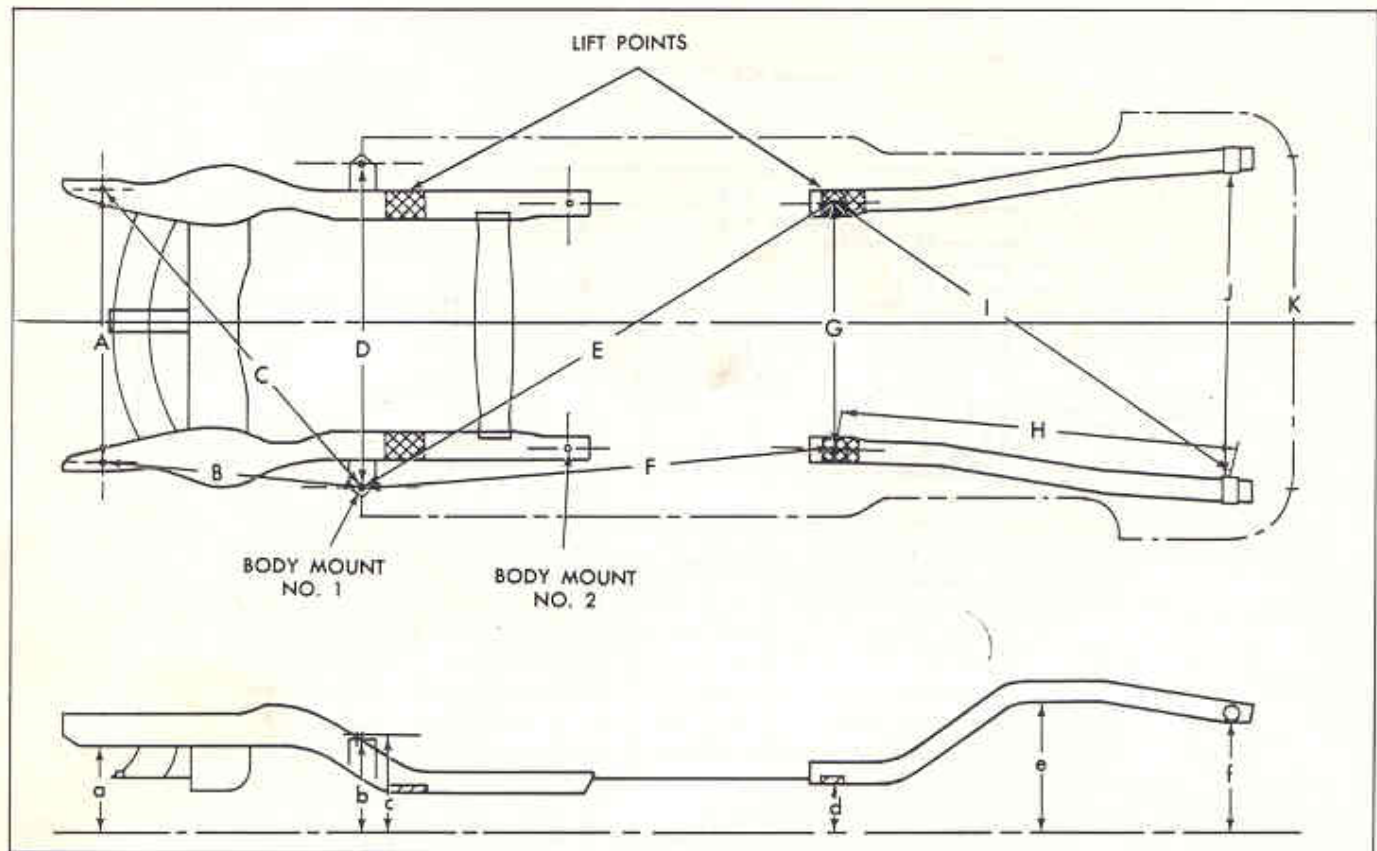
Firebird Checking Dimensions, Lift Points and Body Bolt Locations
